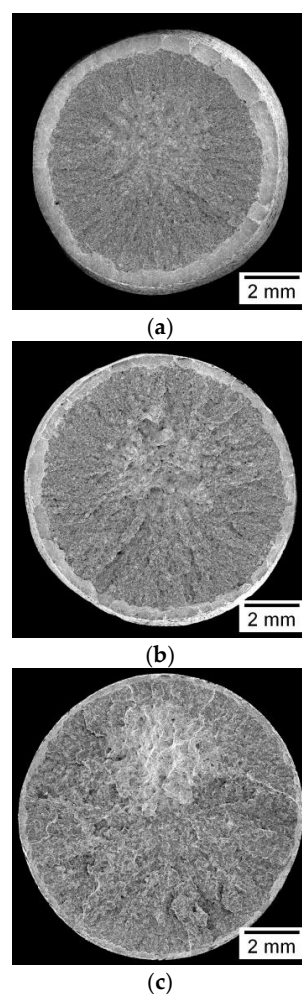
Top view of the fracture surfaces in the steels cooled using: (a) AC; (b) POF; (c) FCF.
